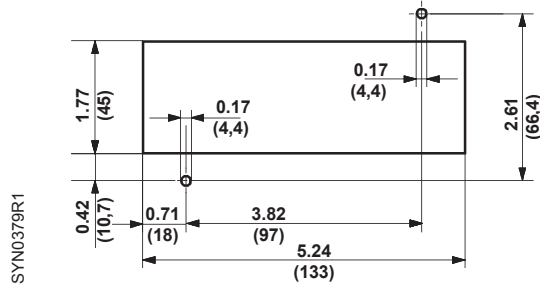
Panel Cutout if Controller is Wired Prior to Mounting.
